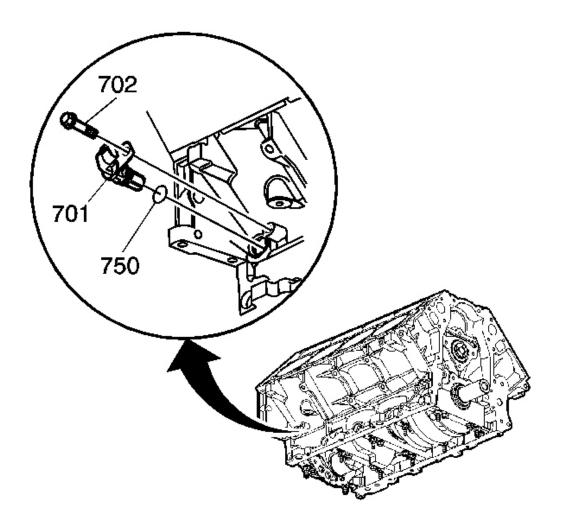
CKP Sensor, Bolt & O-Ring Courtesy of GENERAL MOTORS CORP.
